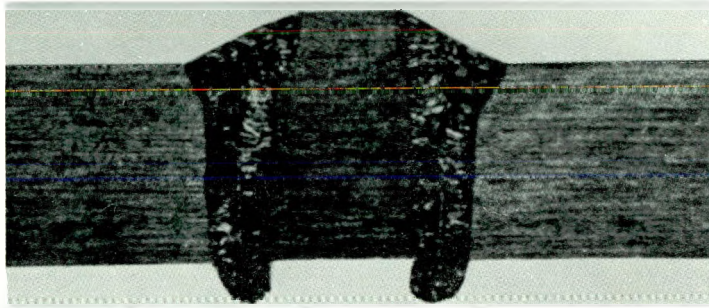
PHOTOMACROGRAPH OF SIMULATED WING-TO-FUSELAGE WELD
